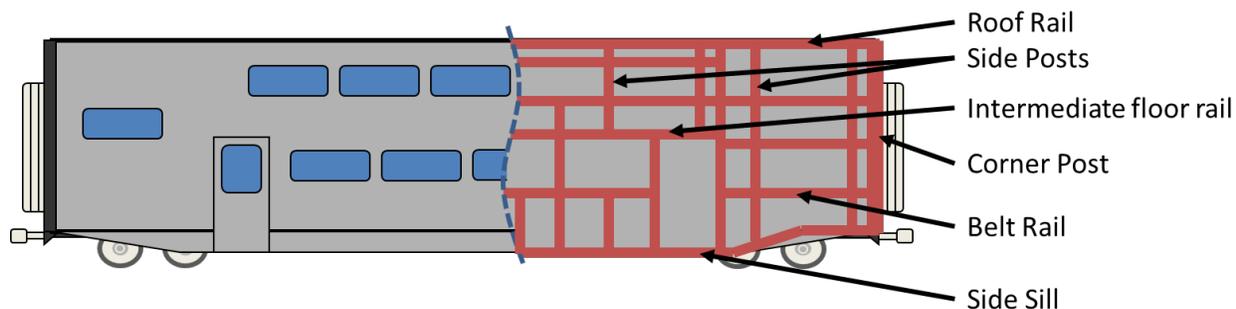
Schematic of Structural Members in Side Wall of Multi-level Passenger Car
